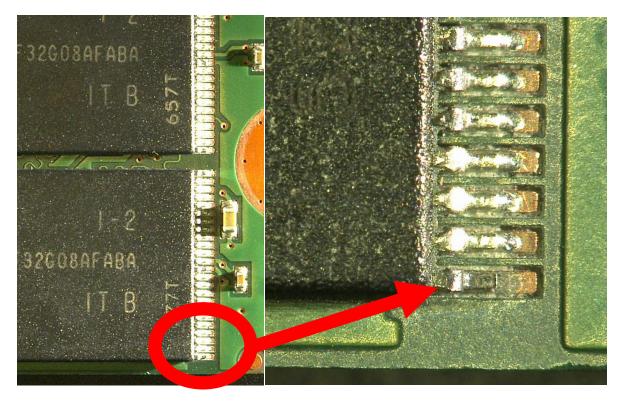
Microscopic view of circuit board with evidence of oxidized solder attachment.
